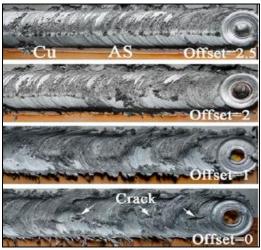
Top view images of different produced surfaces in FSW Cu/Al butt joint, showing the effect of tool offsetting positioning toward Al on the lack of filling and crack defects as Xue et al. showed in their study [54].
